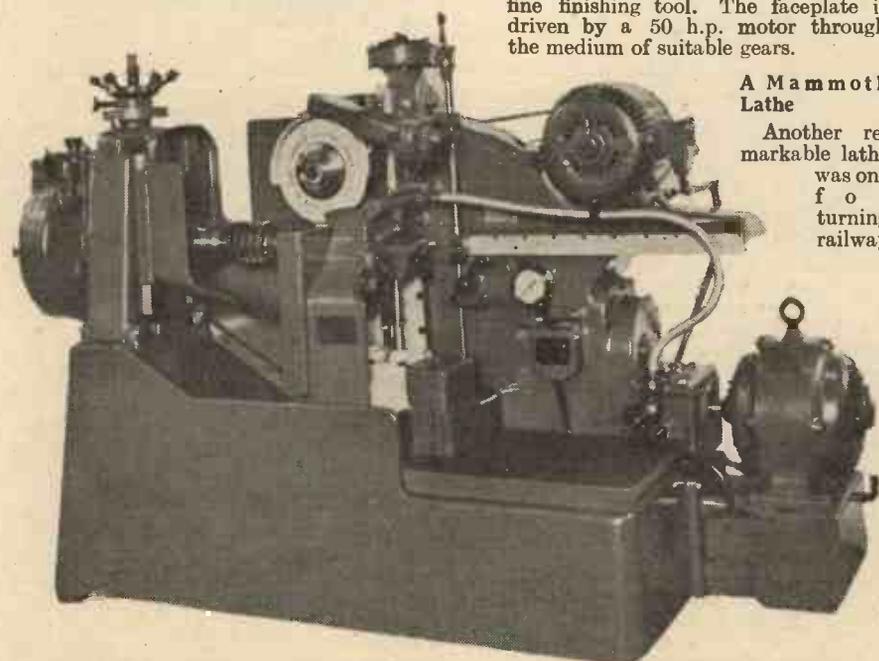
A general view of the Orcutt hydraulic gear-tooth grinder, used for the precision grinding of gear wheels for all kinds of machinery.
